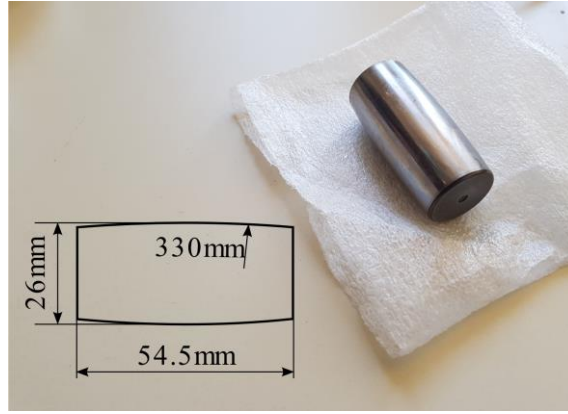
100C6 hardened steel roller. With main dimensions in mm.
